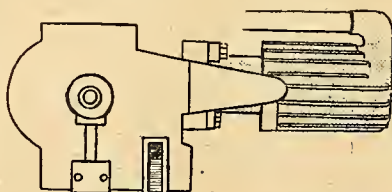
Arrangement of oil pump and sump window on the Wooler engine.
